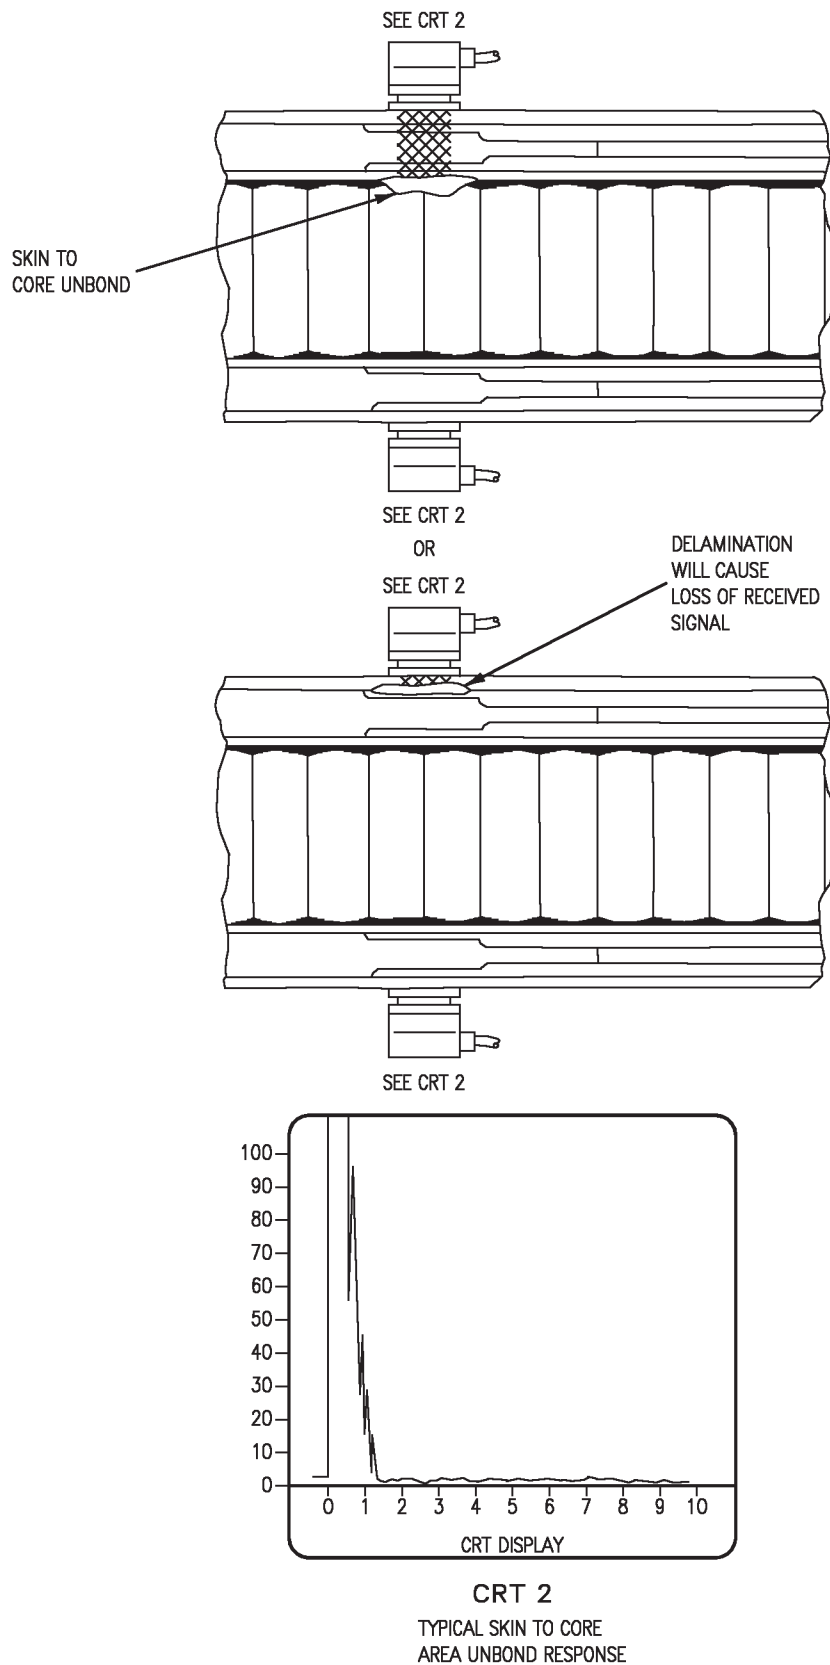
Inspection Procedures for 2 Inches or Taller, Honeycomb Core Areas (Sheet 2)
